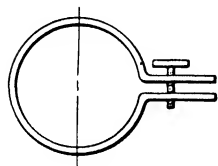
A clamping ring to go over the end of the drawtube which when locked will prevent the drawtube from slipping during an exposure.
